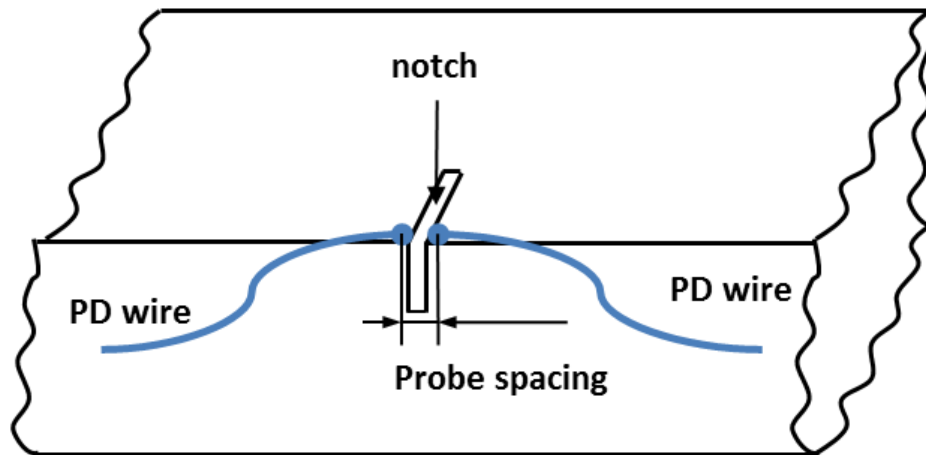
Schematic diagram of spots welding for PD wire
